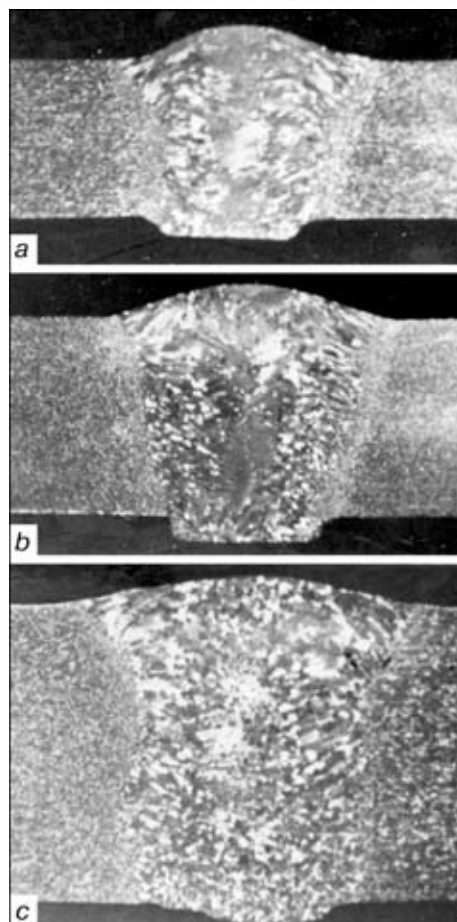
Macrosections of the AMg6 alloy welds 10 (a), 14 (b) and 25 (c) mm thick
